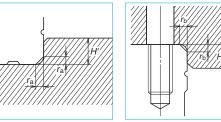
Shoulder for the roller rail datum surface slide datum surface
